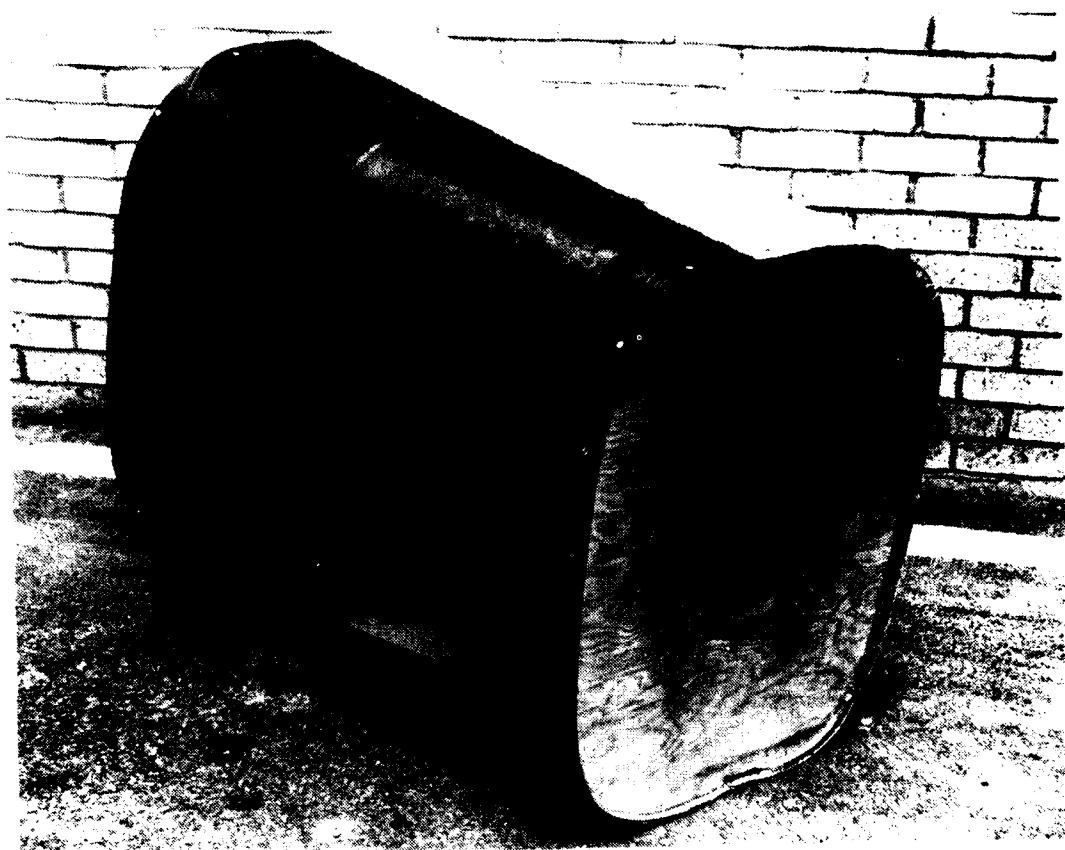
Shell structure specimen - view of test side showing bonded-in floor.
